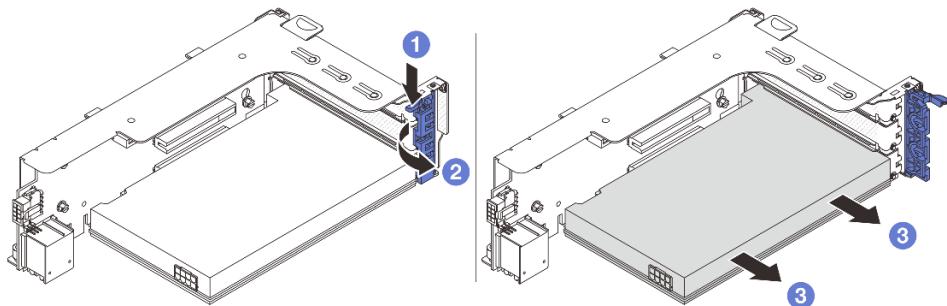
Removing a PCIe adapter from riser 1 cage or riser 2 cage
